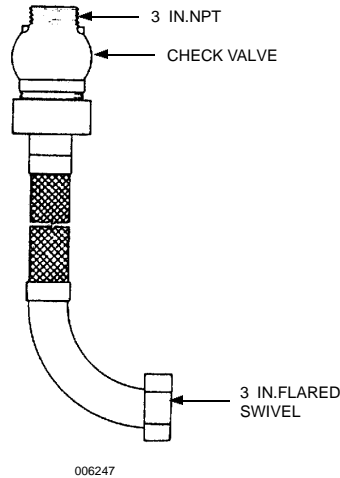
3 in. (75mm) Discharge Hose (Part No. 69841)
